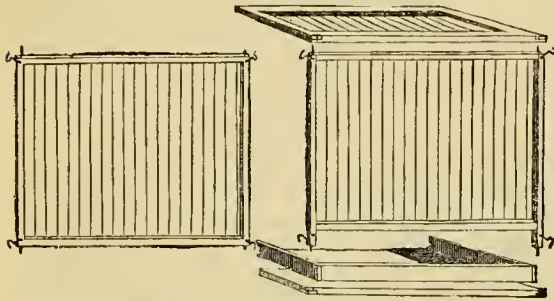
FRONT, REAR, TOP, AND BOTTOM.
